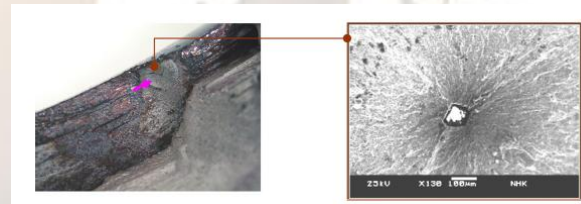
Fracture surface of a coil that failed early due to an inclusion and Its SEM appearance. [4]
